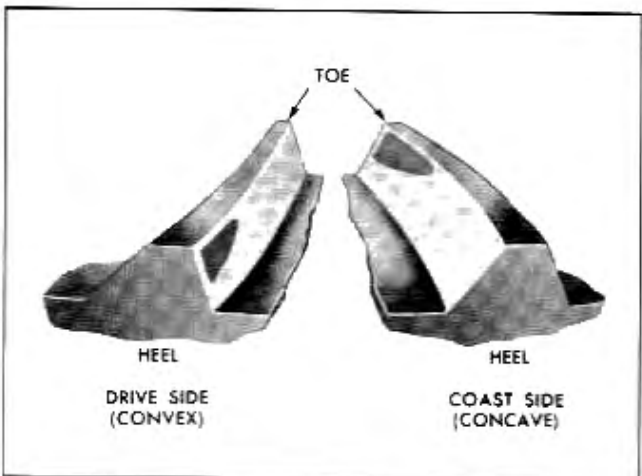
Tooth Pattern When Pinion is Too Far Away From Ring Gear
